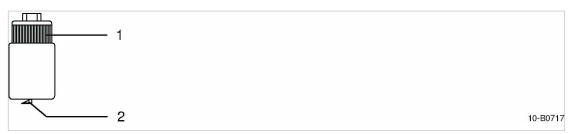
Filter maintenance indicator (machine without sound enclosure)
